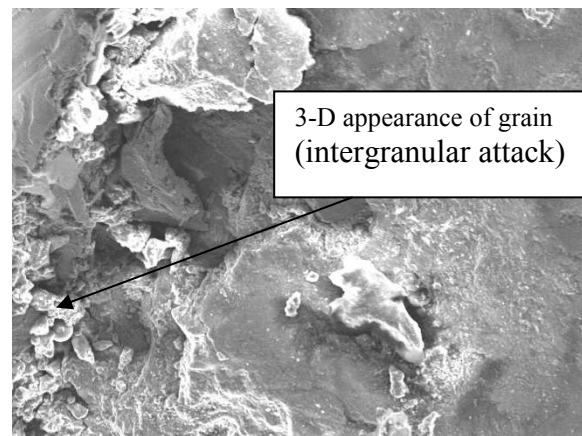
SEM Fractograph of failed valve end (weldment) of nipple, x300
